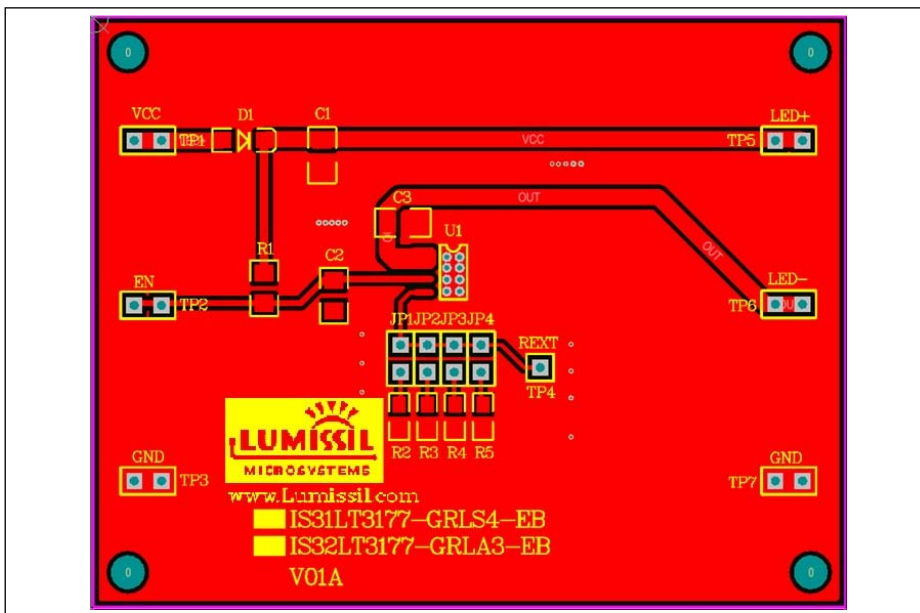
Board PCB Layout - Top Layer (SOP-8-EP)
